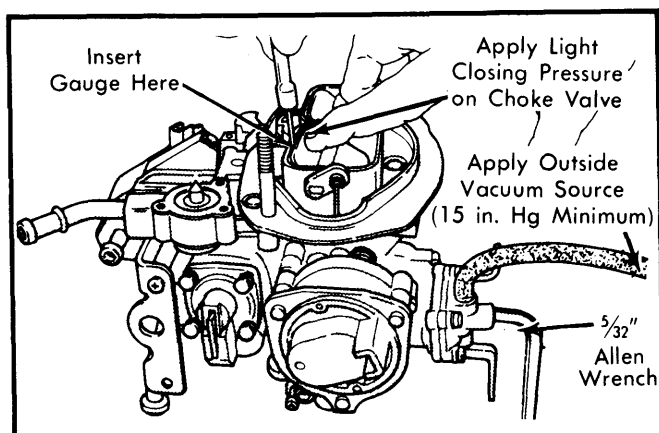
Adjusting Choke Vacuum Kick (Initial Choke Valve Clearance)
